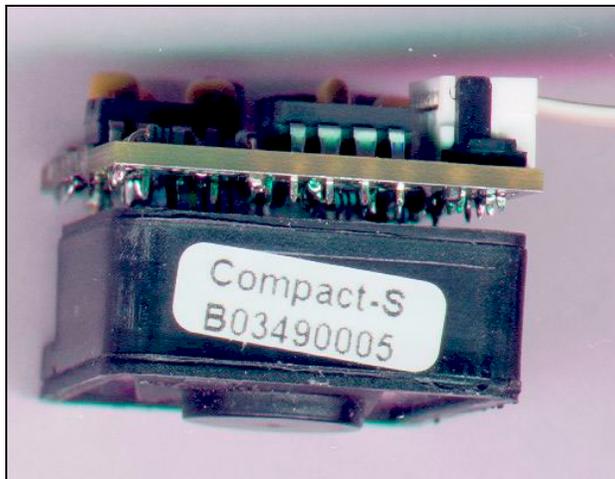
Photos showing assembly procedure for UPTUN beacon
